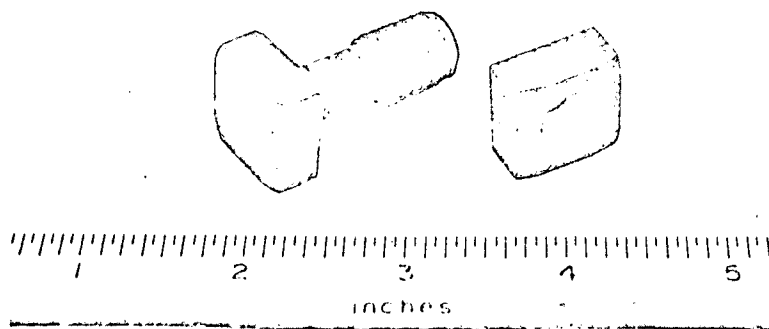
Nut and Bolt Machined from Boride VIII(14,30)-M2 Using Carbide Tooling.
